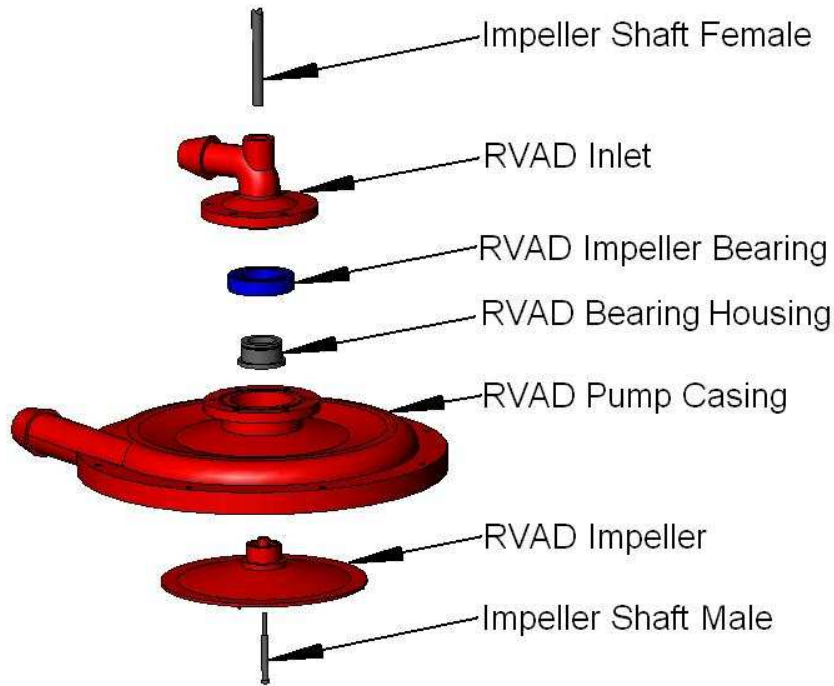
Exploded view of RVAD Components, a sub assembly of the complete device.
